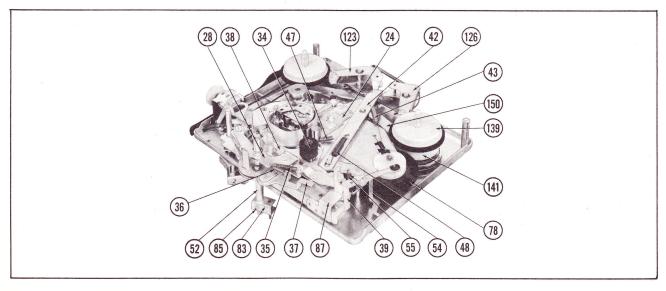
Exposed View of Transport Mechanism With Amplifier Chassis Removed
